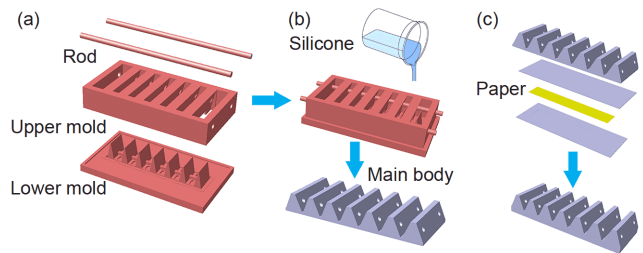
illustrates the fabrication process of the Pneu-Nets bending actuator which is mainly made of silicone. The Pneu-Nets actuator mainly consists of two parts: the main body, and a base which contains the inextensible paper layer. As shown in Figure 2(a) and (b), the main body is cast in upper and lower mold, two rods are installed on both sides of the upper mold to form a through hole of the Pneu-Nets actuator for fixing the elastic cord. To make this Pneu-Nets bending actuator, the main body and the base are cast separately and then stuck together, as shown in Figure 2(c).
